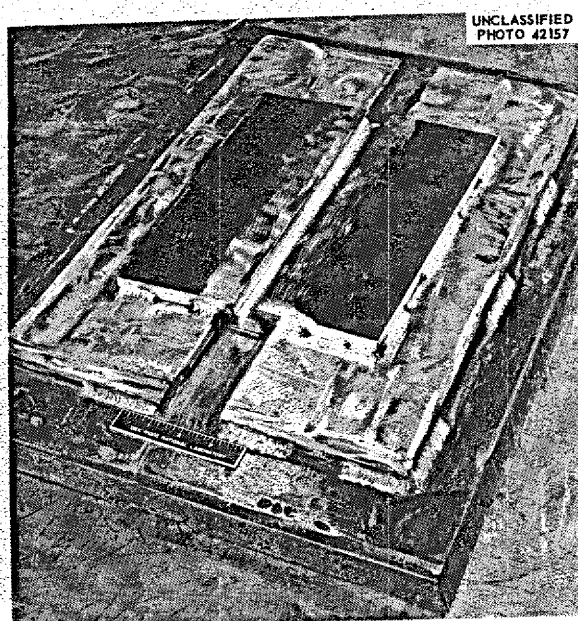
Weld Test Plate Assembly After Tack Welds Were Made.
